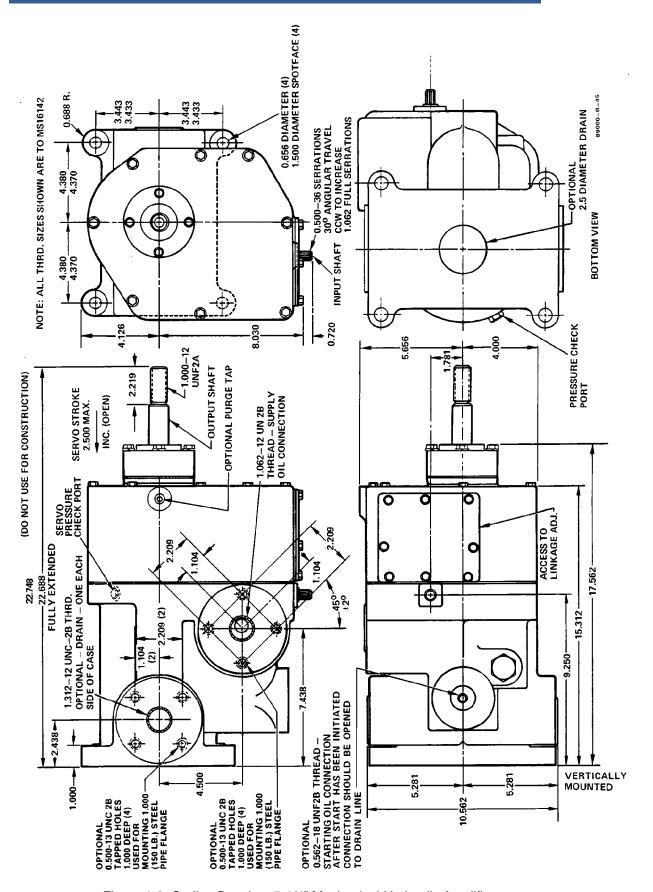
Outline Drawing, 5-1/4" Mechanical-Hydraulic Amplifier
